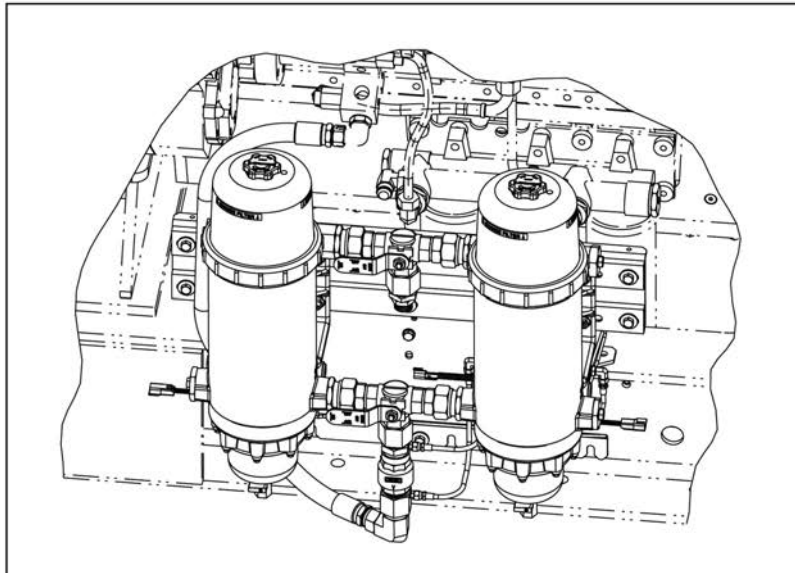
INSTALLED FUEL FILTER ASSEMBLY
